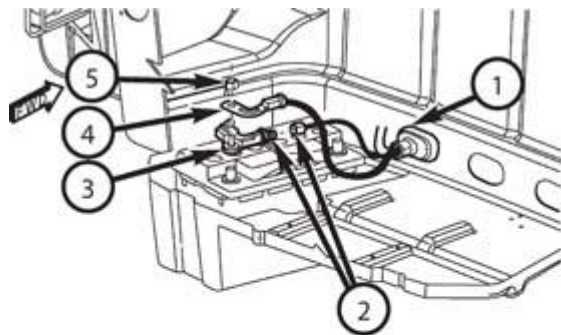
Identifying IBS, Electrical Connector, (-) Battery Post, Cable Nut & Cable
